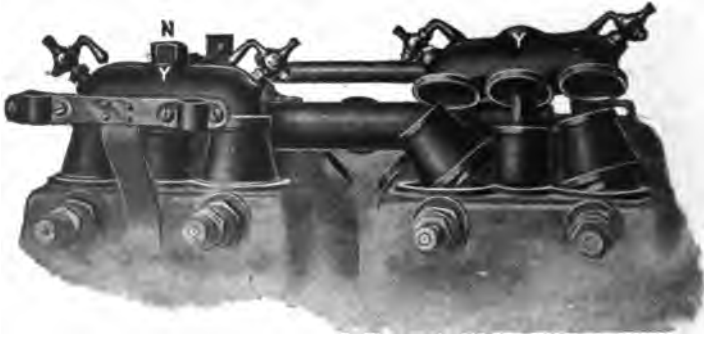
View of Locomobile Motor Inlet Valves, showing ease with which they may be removed.
